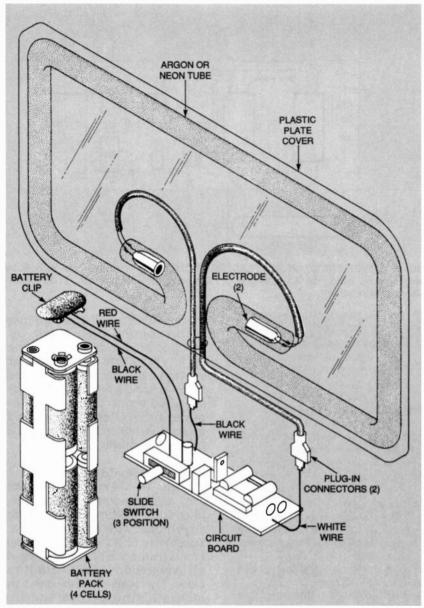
NEON OR ARGON GAS TUBE LICENSE PLATE frame system showing driver circuit connections to the gas tube/ cover assembly.
